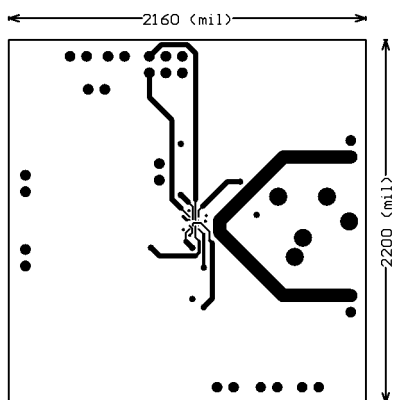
Recommended YZR PCB Layout: Mid Layer 1
